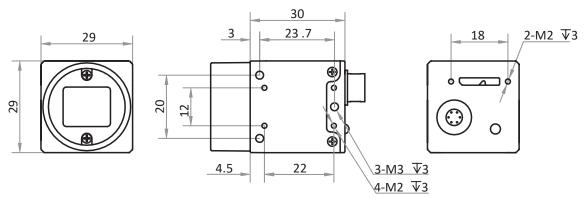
29 mm×29 mm×30 mm Mechanical Dimensions (in mm) of the USB3.0 camera with the USB interface at the top.
